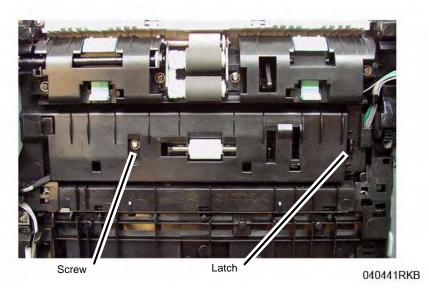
Feed and Reg Sensors PWB Cover (Bottom View)
